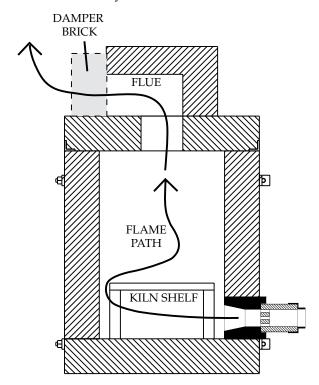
A sectional drawing of the simple updraft kiln. This kiln design can be used to burn out wax molds for foundry work or glass casting and it can be used to fire ceramics. The overall height is 13.5" from floor to ceiling. The firing chamber is 9" by 9" by 10" or 810 cubic inches. Draft is controlled by the use of a damper brick. Secondary air can be introduced through small holes in the soft brick walls which are kept plugged when not in use.
